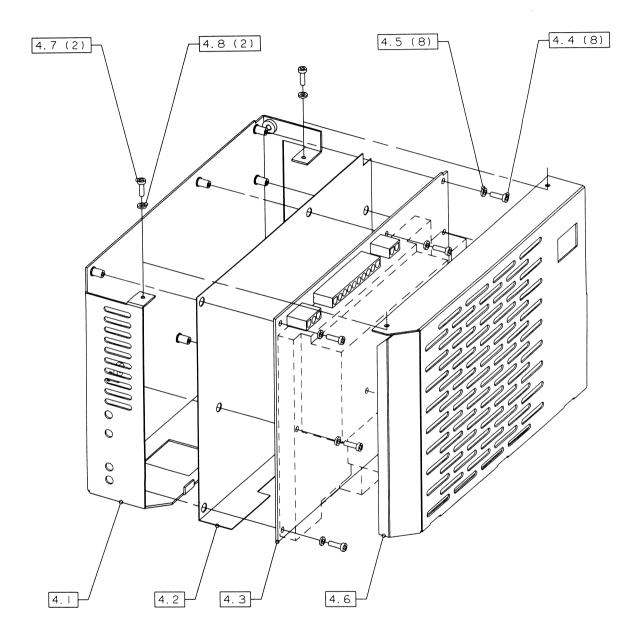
93XX-PSI715 POWER SUPPLY EXPLODED VIEW
